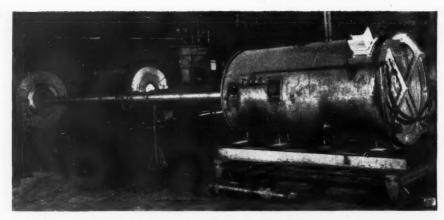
The ends of the drill collar are heated simultaneously, using portable furnaces mounted on car-frames. The piece is oil-quenched in α tank in the floor.
